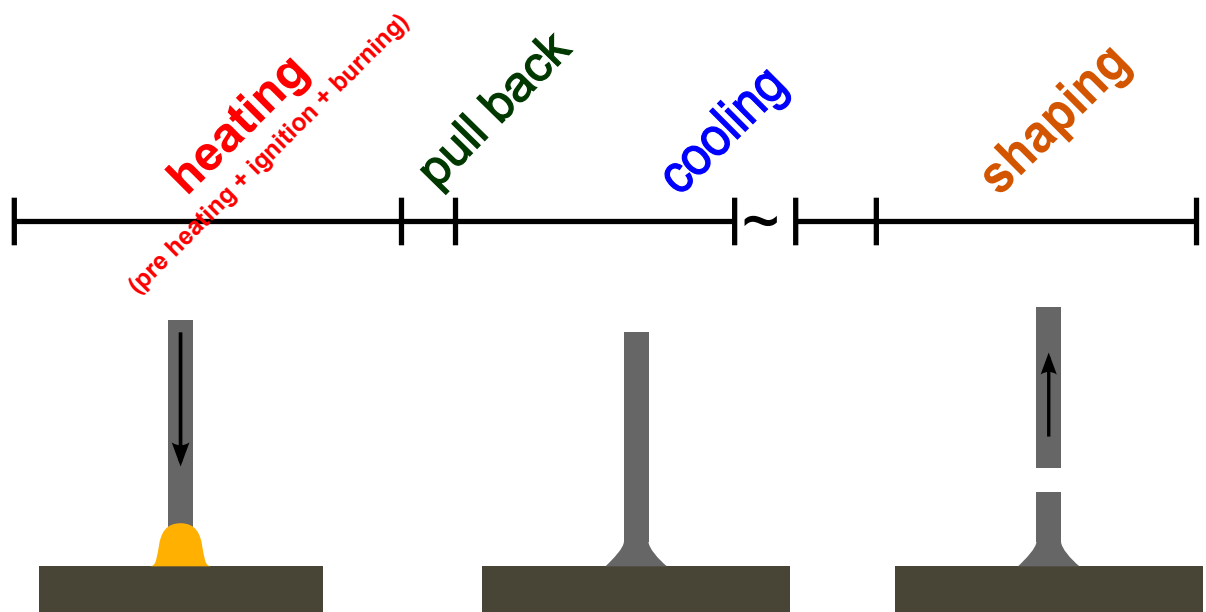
Illustration of the different stages of the pin welding process.
